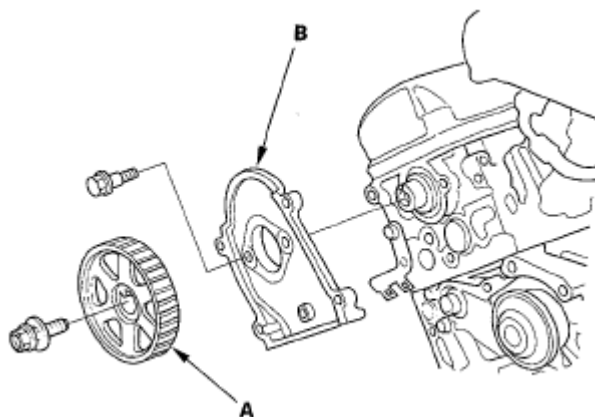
Identifying Front And Rear Camshaft Pulleys
